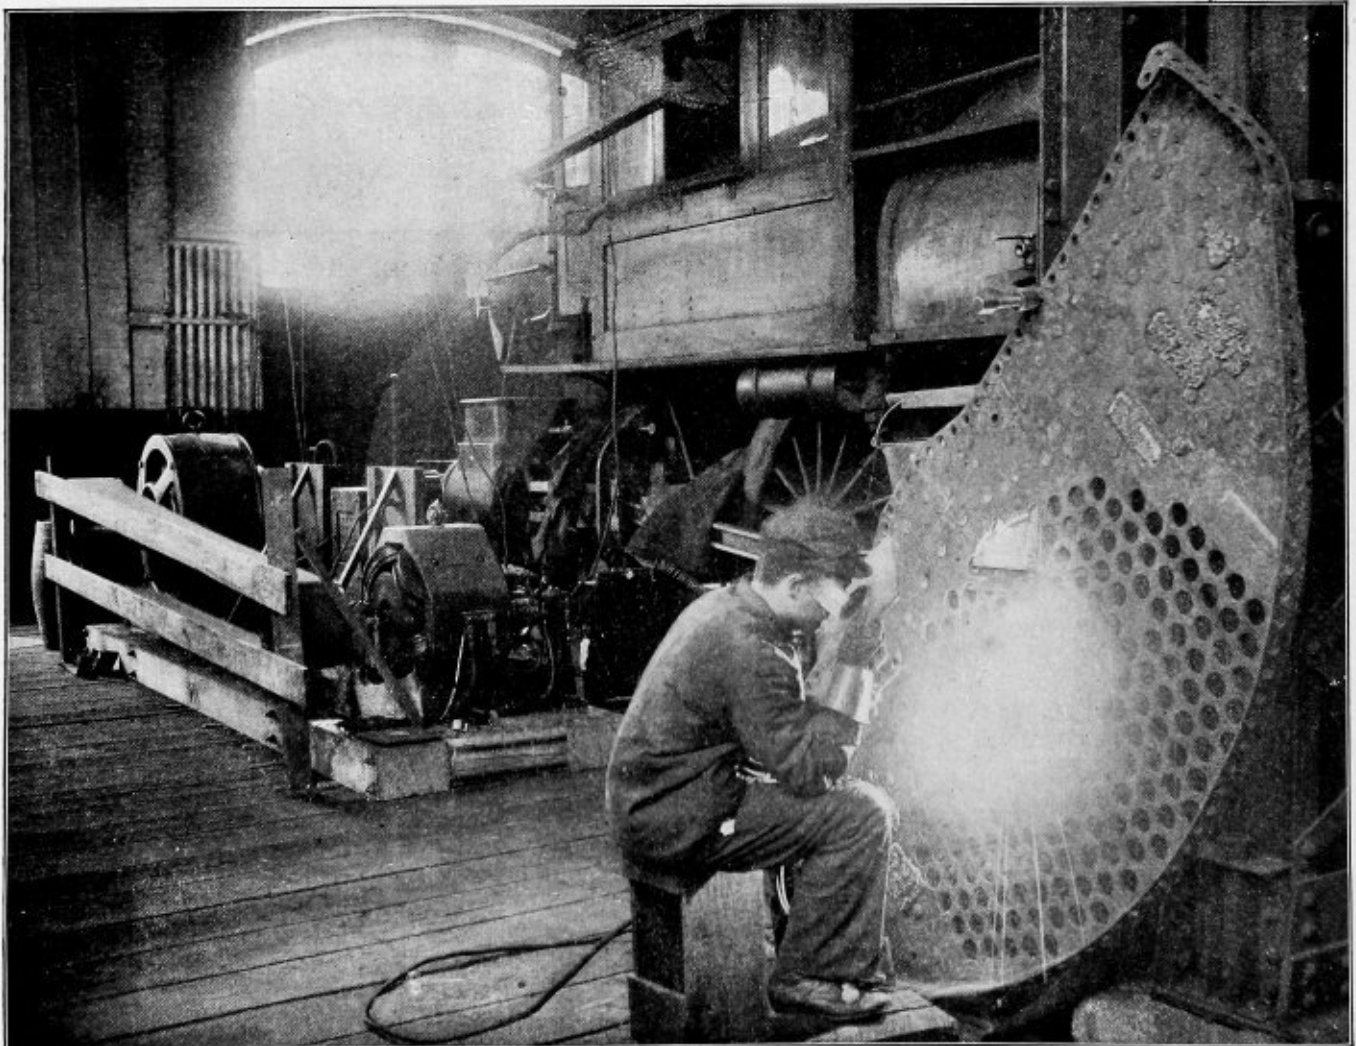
ELECTRIC WELDER AT WORK; ELECTRIC MACHINERY IN THE REAR IS A TEMPORARY INSTALLATION
